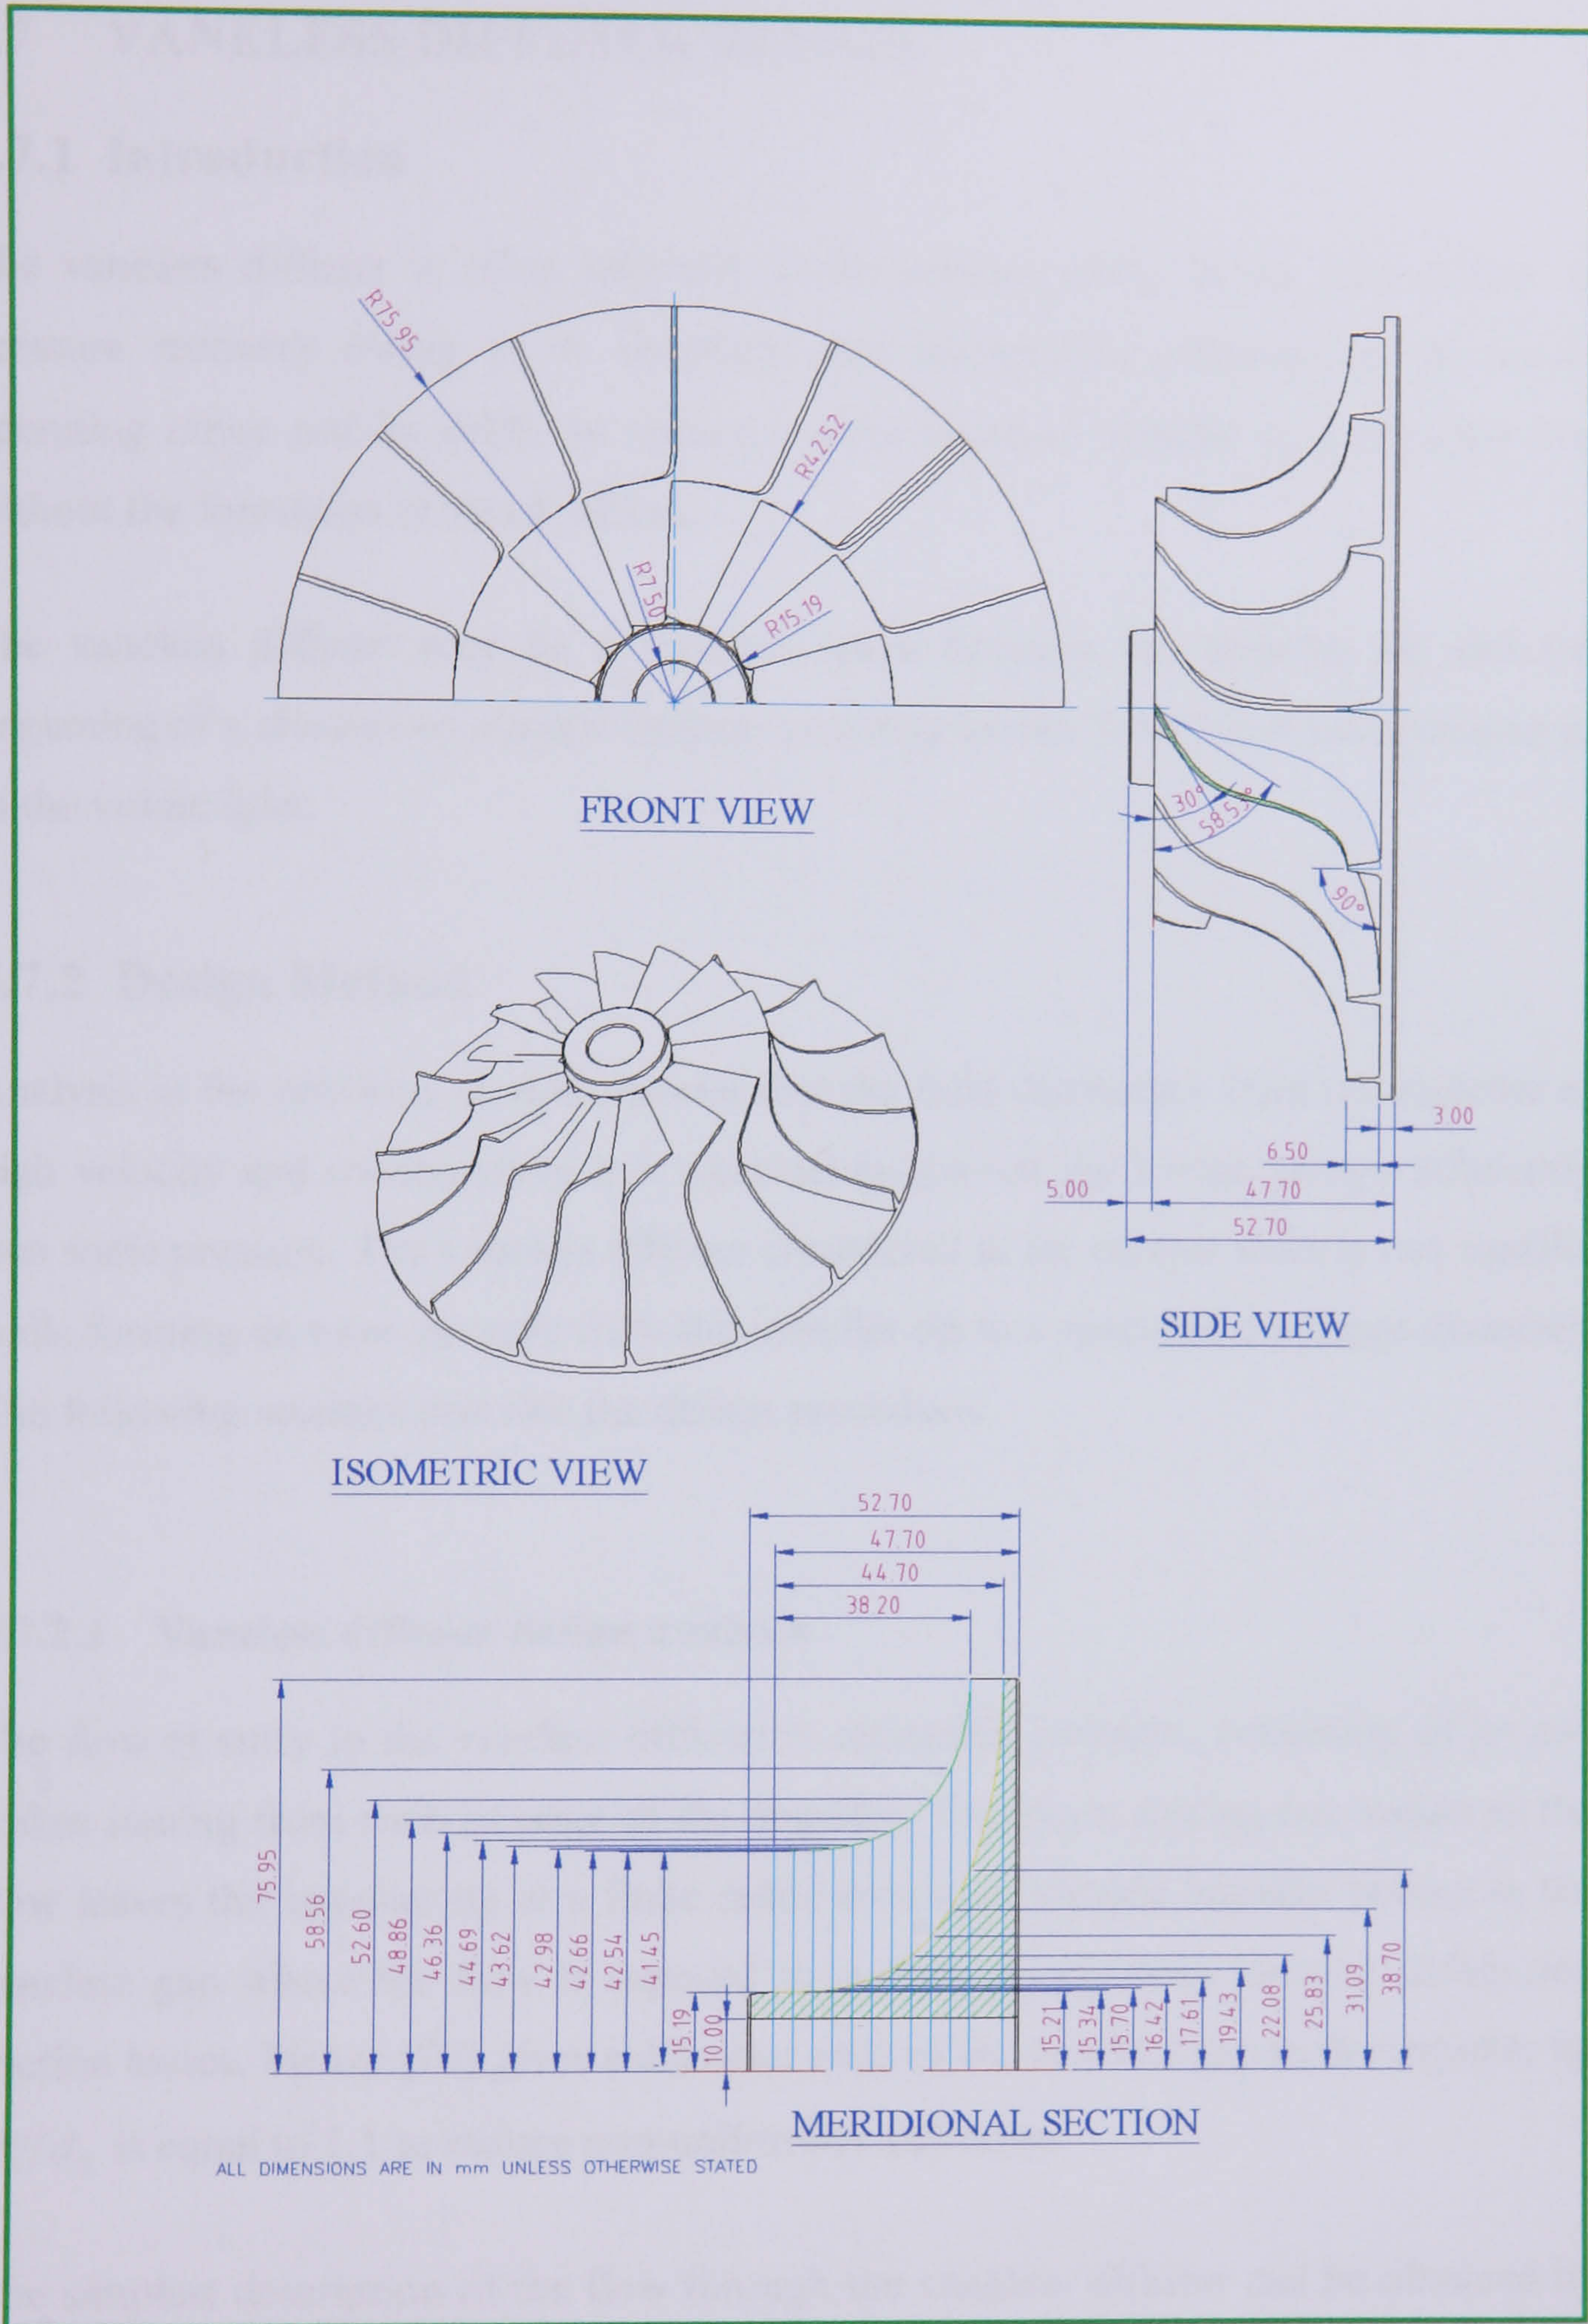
DETAIL DRAWING OF THE IMPELLER
